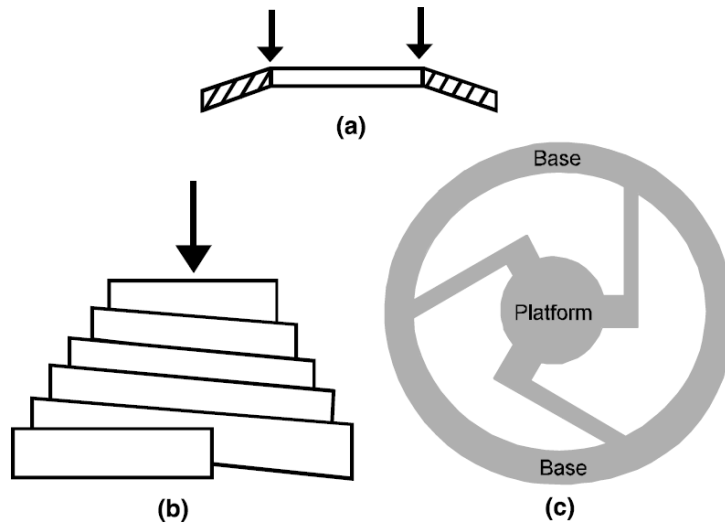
Three types of ortho-planar springs [11]: (a) cross-section of a Belleville disc springs, (b) volute springs and (c) spider springs.
